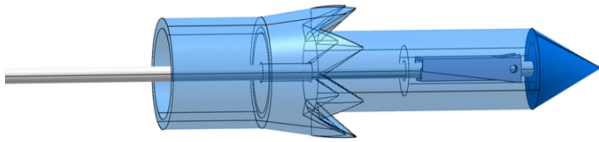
RemoveDEBRIS Harpoon Projectile.
